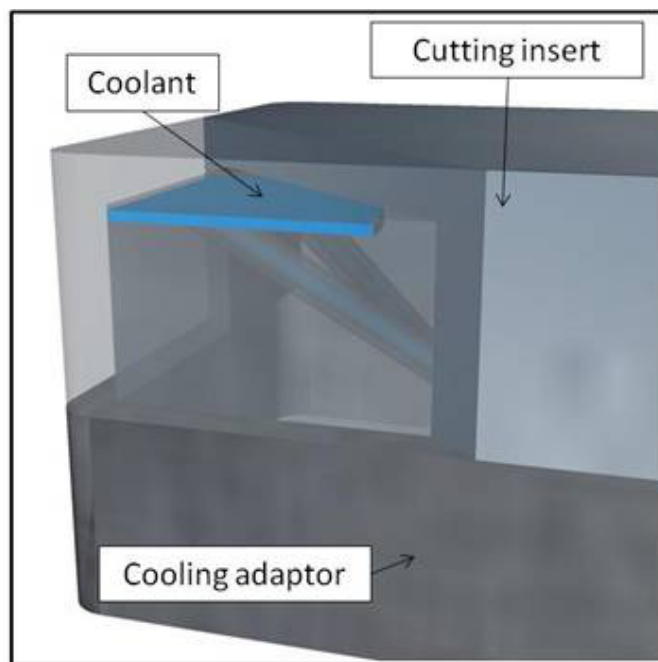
Bottle-cup-shaped and squared cutting insert assembled onto the cooling adaptor. The transparent corner of the insert makes the internal pool of coolant and the micro channels in the adaptor visible.
